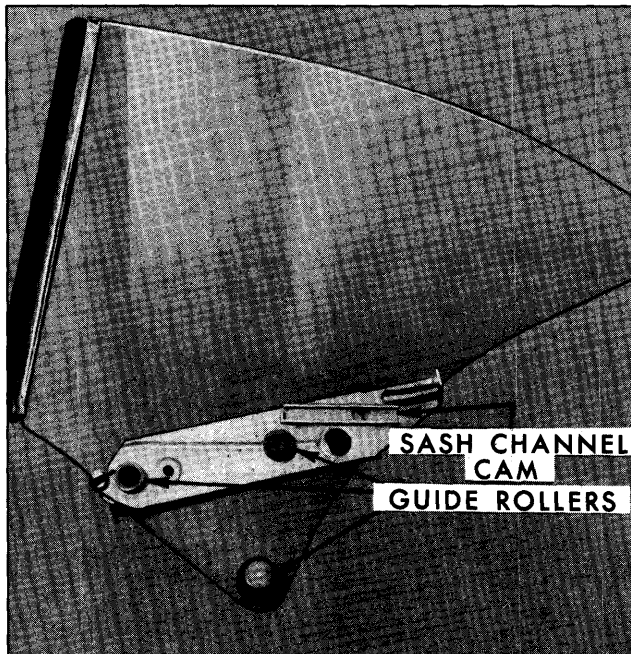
Rear Quarter Window Assembly "A - 37, 67 & 87" Styles
